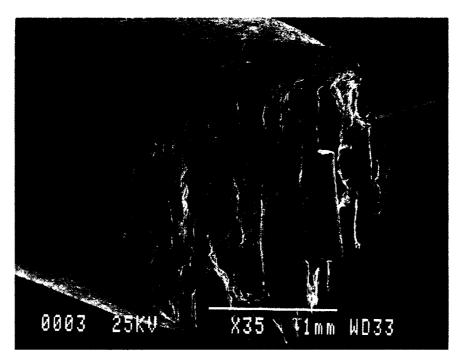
Fracture surface in an EB weld of the fine grain (ASTM 9-10) GTD 22.
